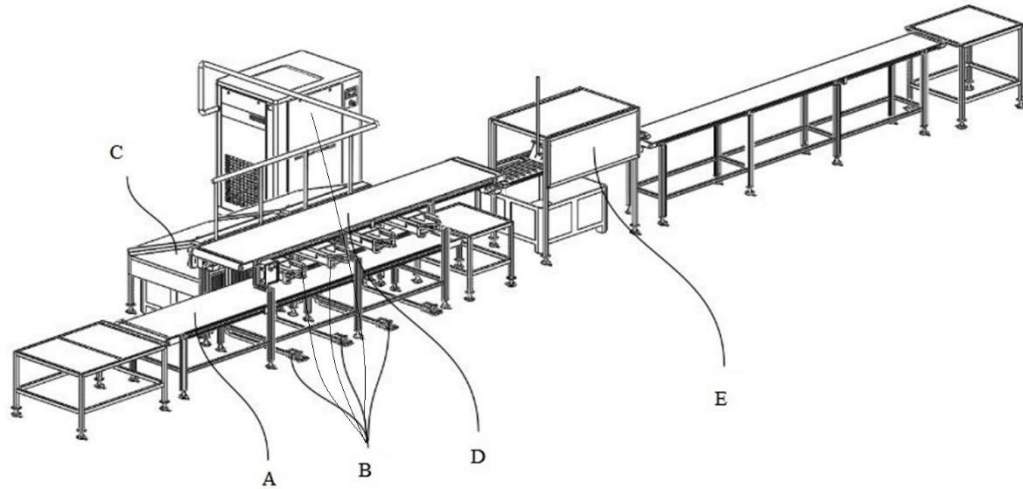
Processing flow. A) Conveyor belt; B) pneumatic pedal drive; C) container for collecting processing waste; D) second conveyor belt; E) cutting, washing, and drying block
